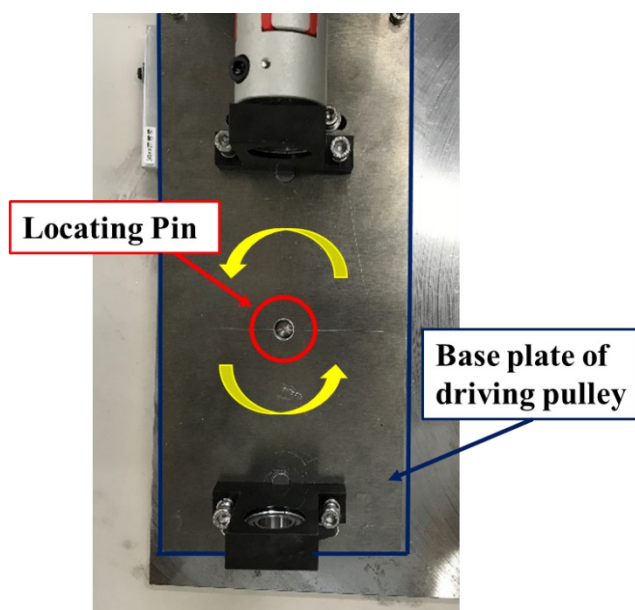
Locating Pin for rotating base plate of driving pulley.
